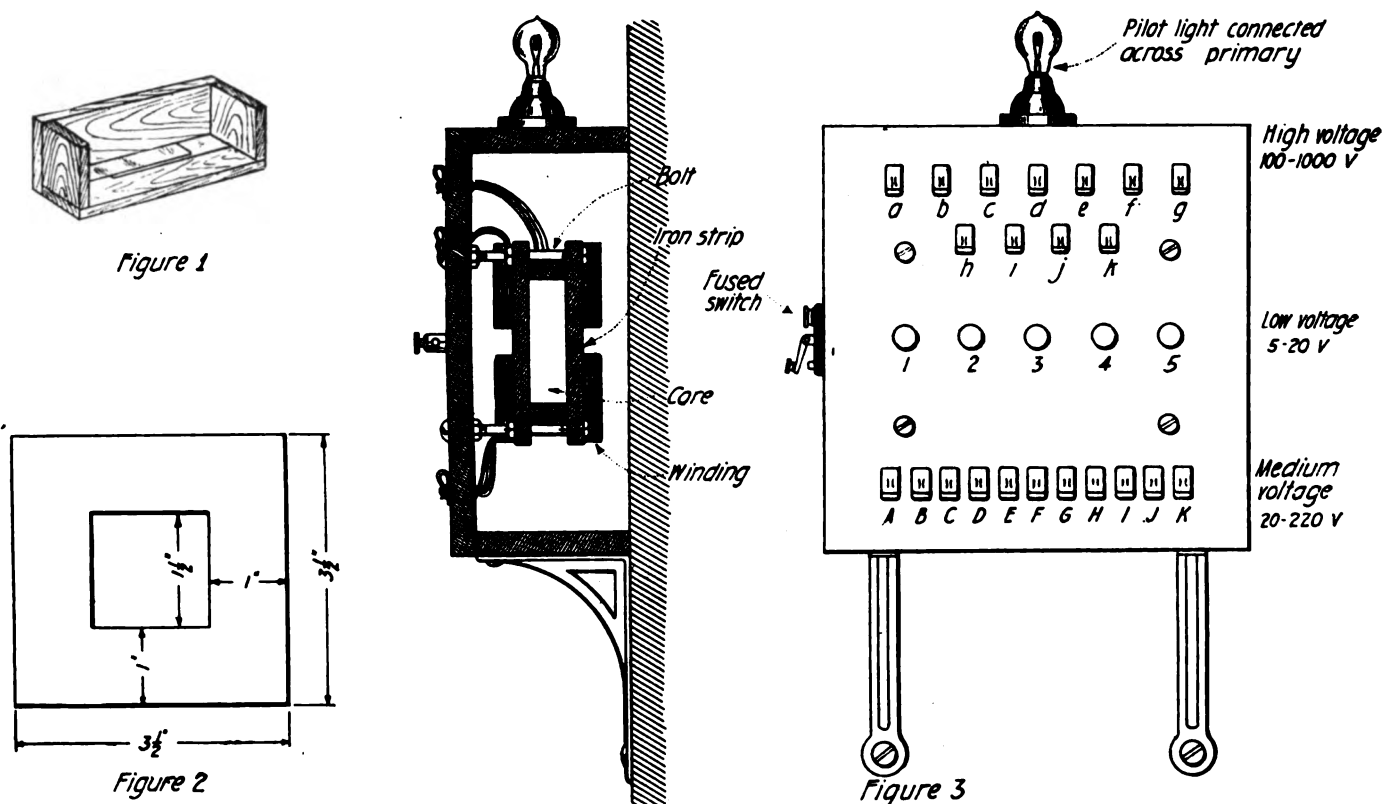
Box for assembling core. Figure 2—Dimensions of coil heads. Figure 3—Transformer completed showing interior arrangement and method of connecting leads
